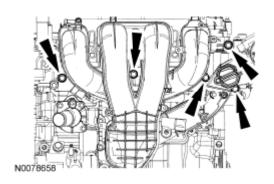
Locating Intake Manifold Bolts Courtesy of FORD MOTOR CO.
